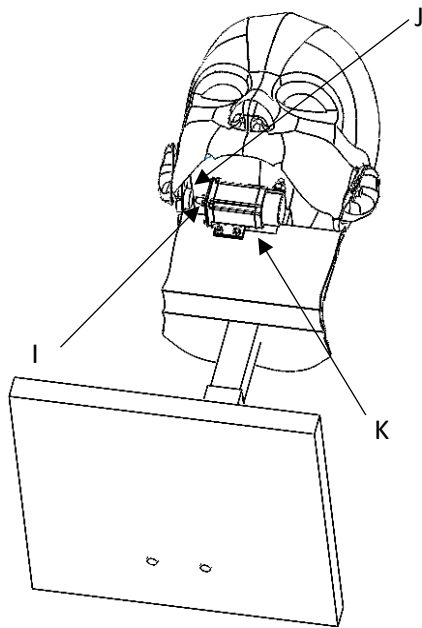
Outlined view of the mannequin head, showing the servomotor and its support mechanism.
